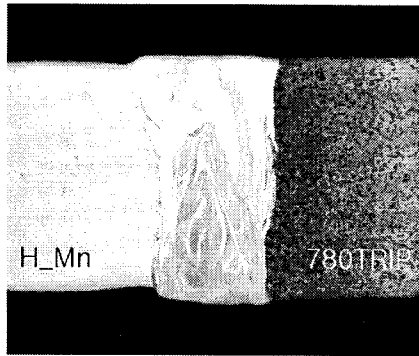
Optical micrograph of the dissimilar laser welded joint of high Mn steel and 780TRIP steel.
